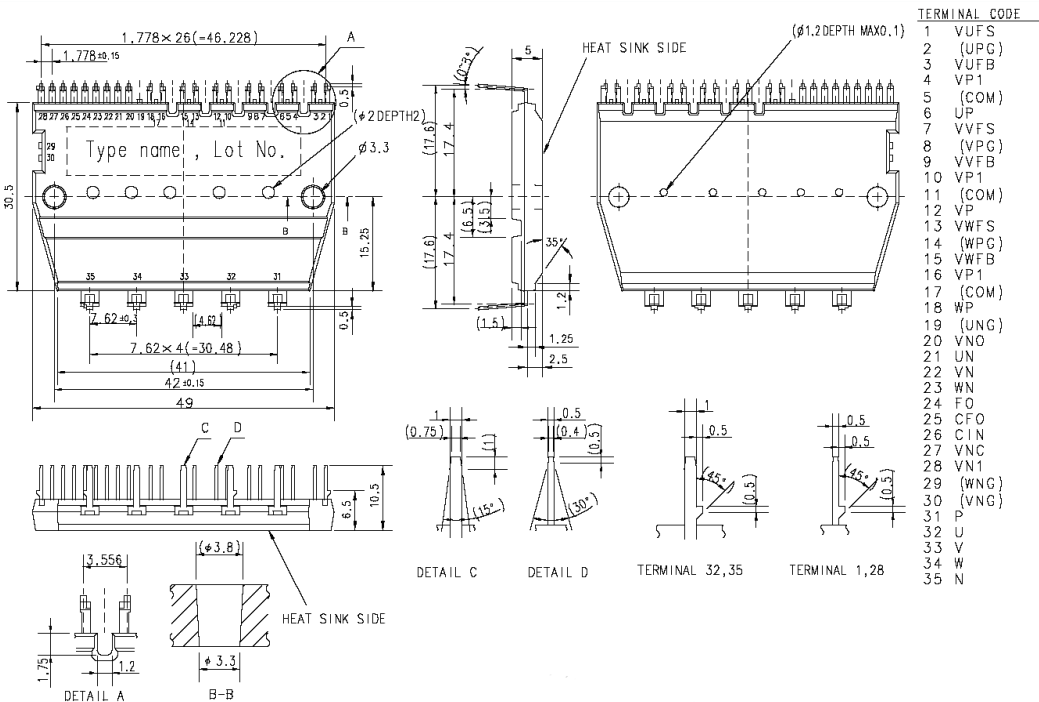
Package Outline Drawing of mini DIIPM(PS2156X-P)
